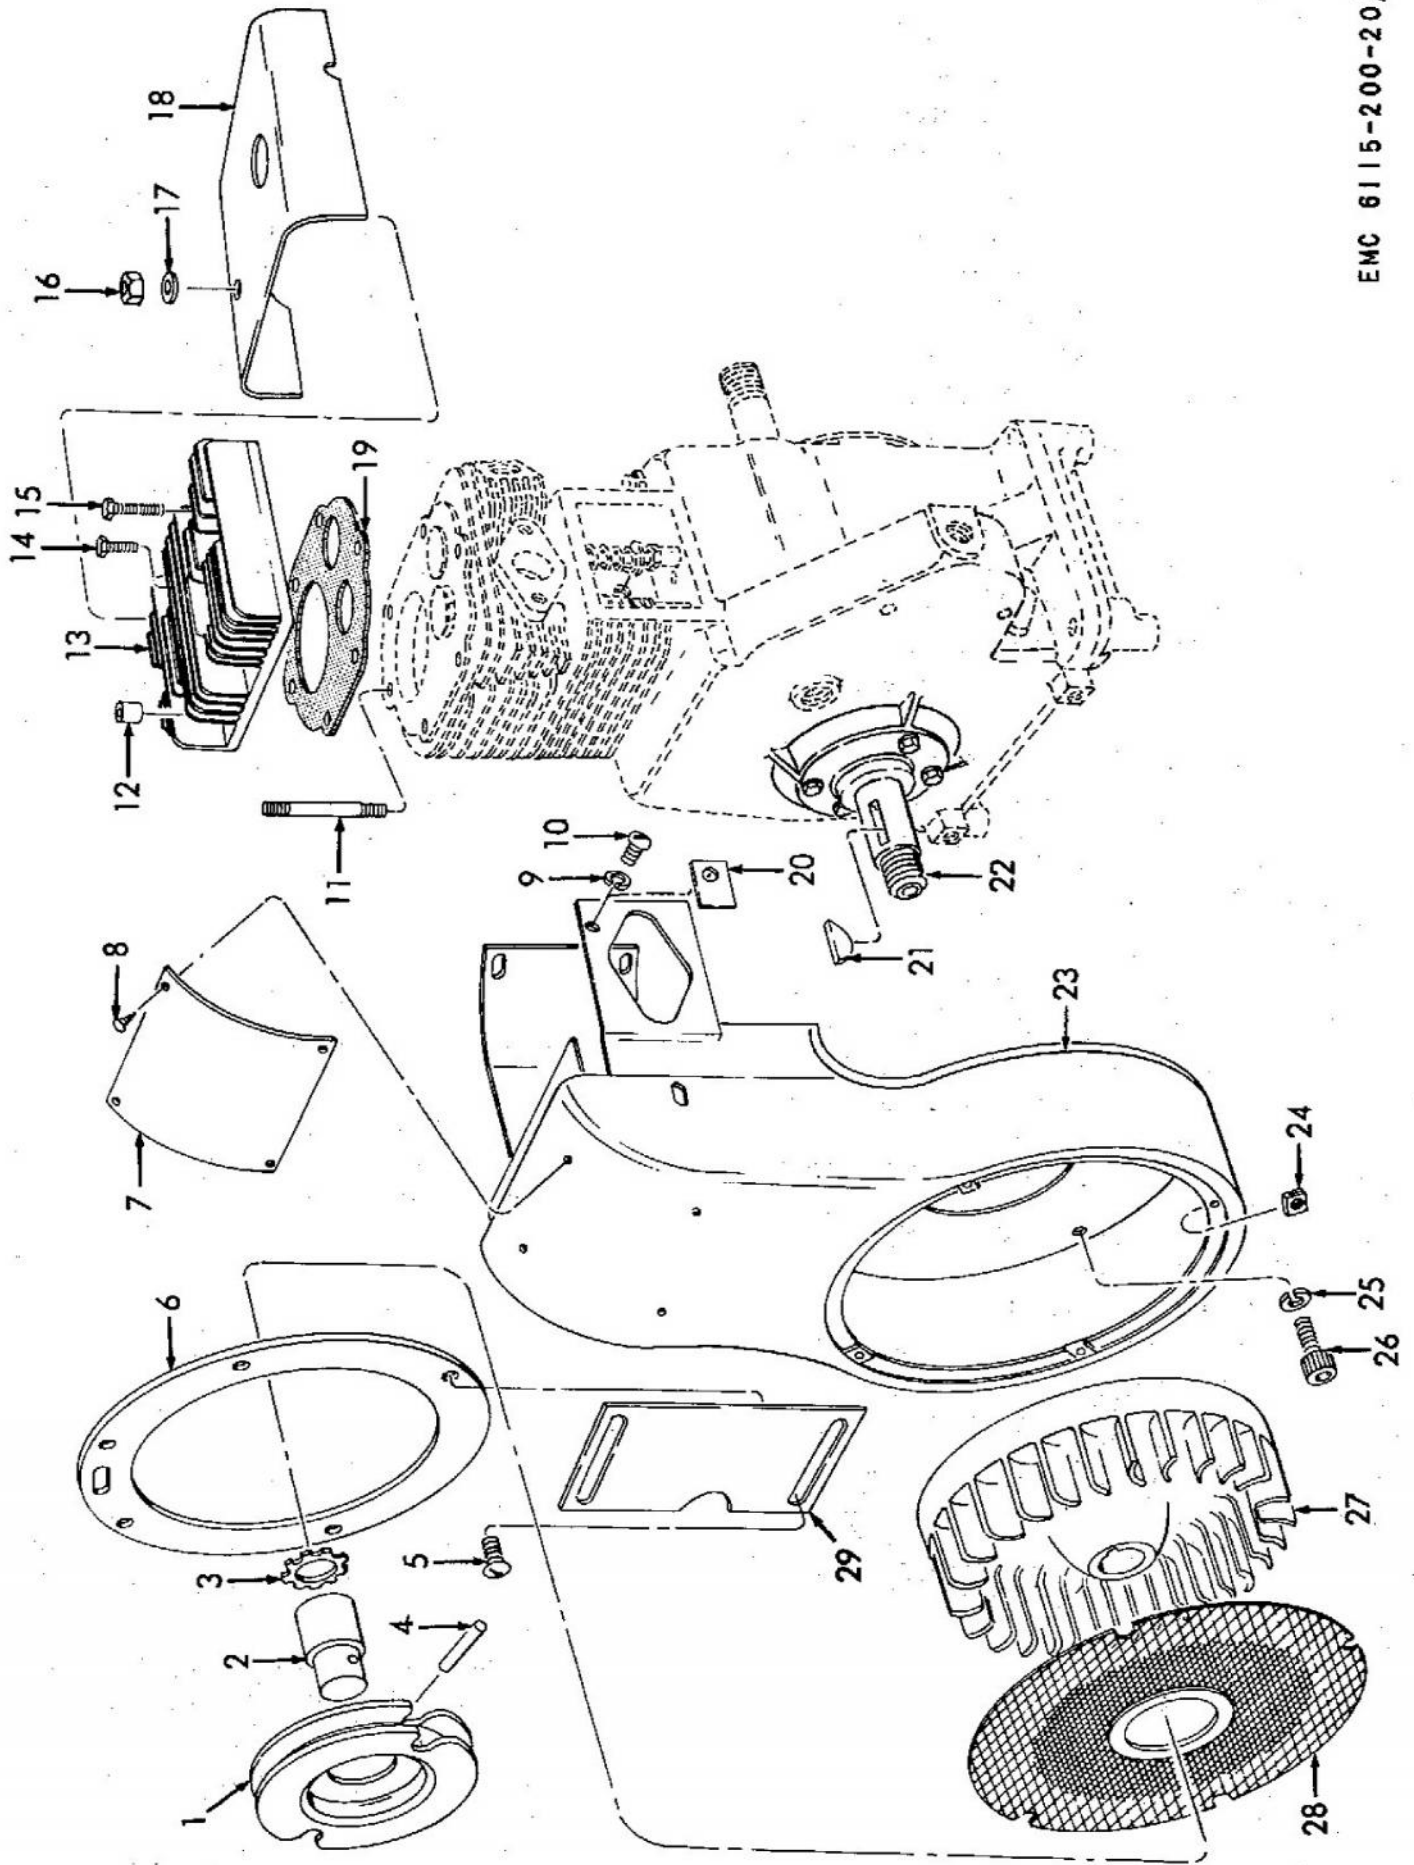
Cylinder head, starting sheave, flywheel, and air shroud, exploded view.
